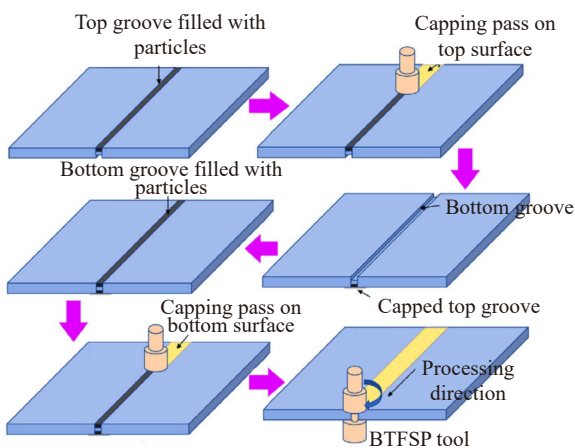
Schematic diagram of the steps followed for fabricating double-side composite using bobbin tool friction stir processing [91].
